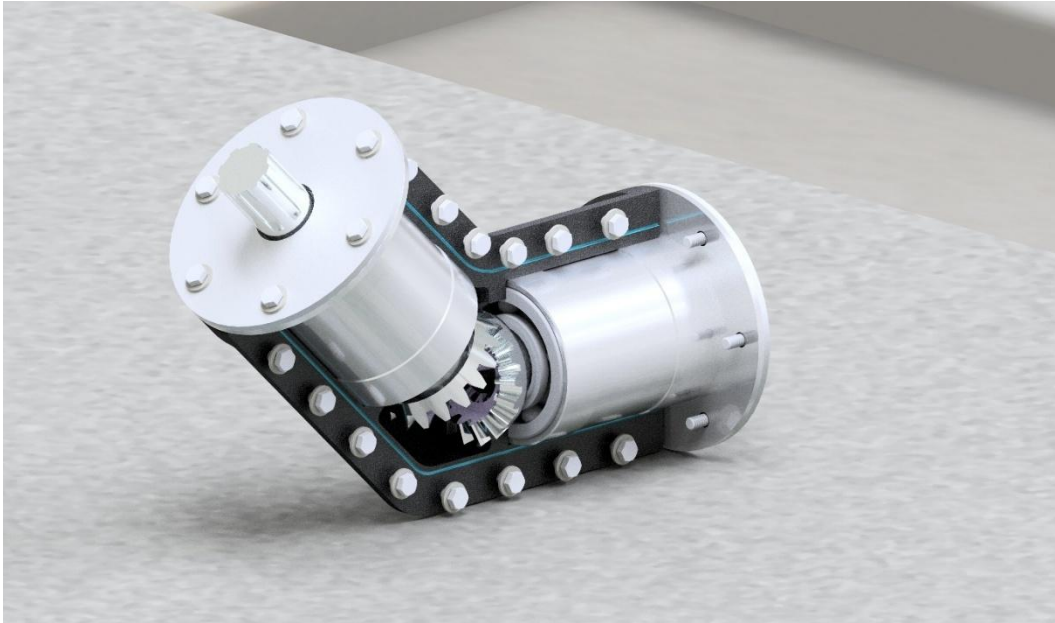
Sample Pictures: Gearbox with 135° bevel gears
